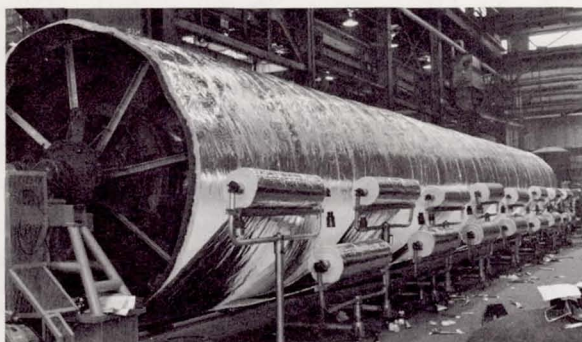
Machine winding of multilayer insulation on large tank. (Courtesy Linde Div., Union Carbide Corp.)
